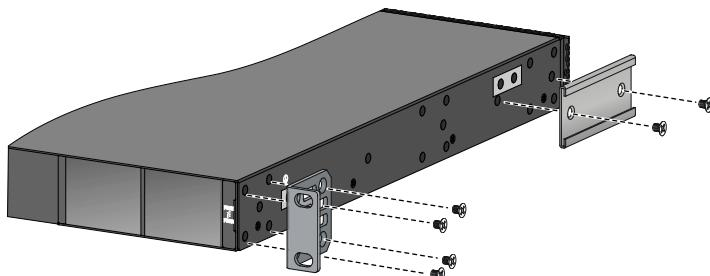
Attaching the mounting brackets and chassis rails to an HPE 5710-54HT switch (mounting brackets installed near the power supply side)
